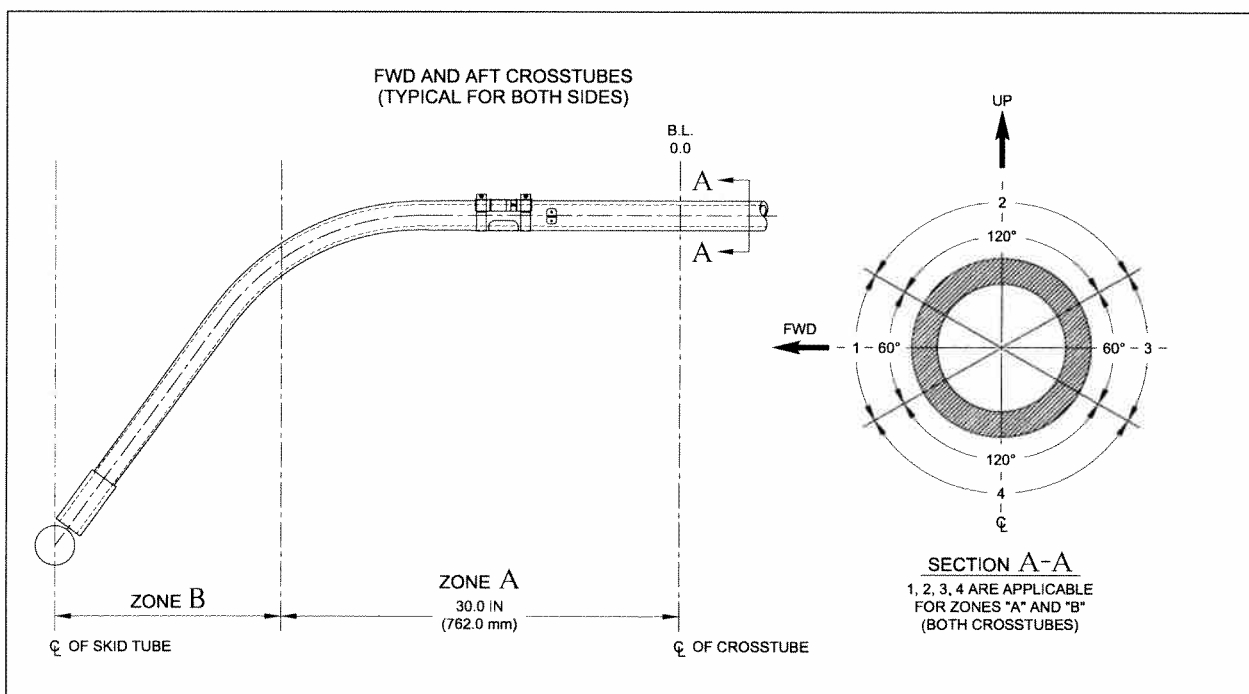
HIGH SKID GEAR CROSSTUBE DAMAGE LIMITS
